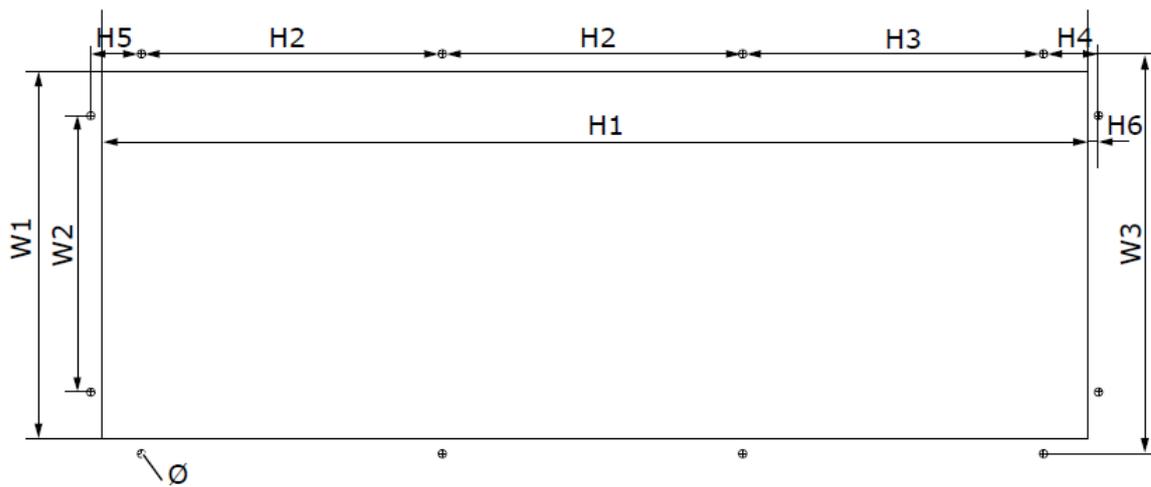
Dimensions of the Opening and Drive Outline with Flange, FR7
